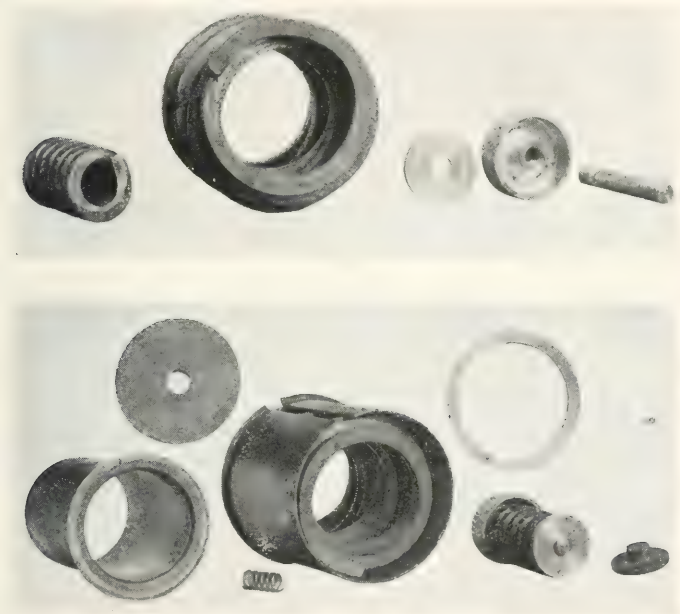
FLEXIBLE DRIVE DETAILS, SEPARATE AND PARTIALLY ASSEMBLED
